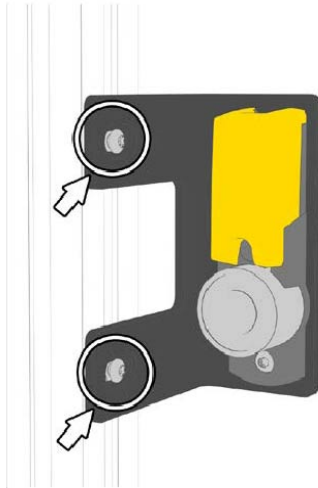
Attach the mounting plate with the process guard locking to the profile and tighten the Torx screws M8 x 12 mm.
